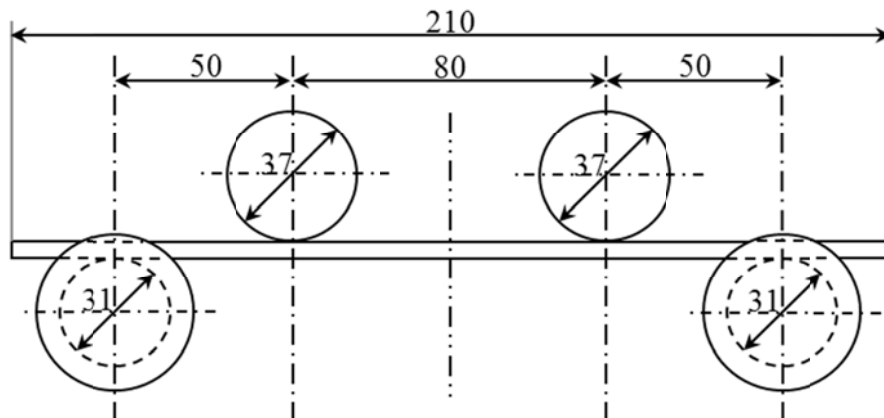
Schematic of four point bend test jig (dimensions in mm)
